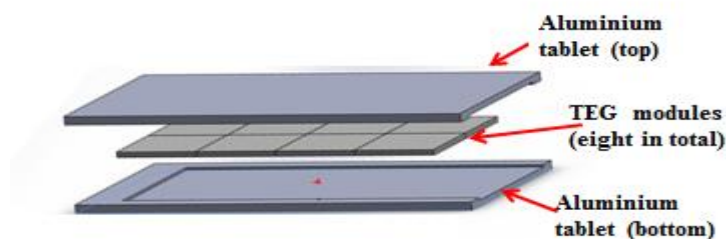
Exploded CAD view of aluminium plated with TEG modules
